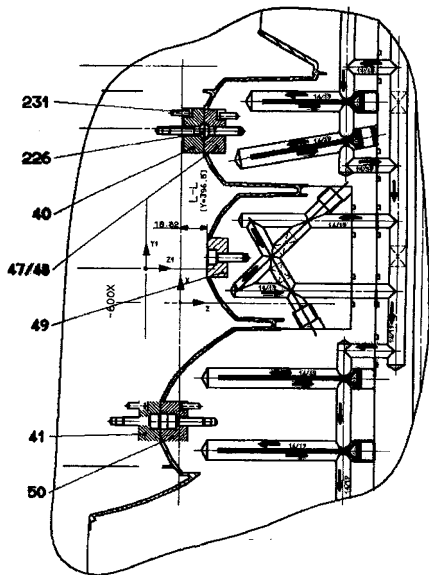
Injection mold for tail light housing, part section showing cooling channel arrangement
